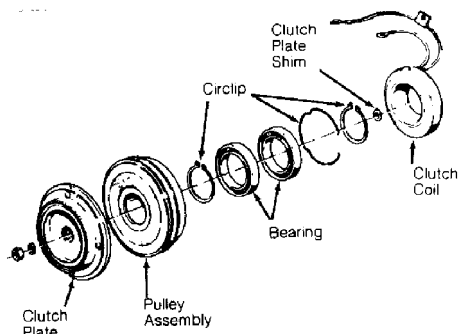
Exploded View Of Compressor Clutch (Bosch 6-Cylinder)
